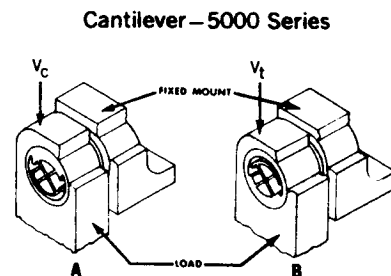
Basic Loading Conditions for Cantilevered Flexural Pivots. Two cantilevered pivots of standard stock size are required per planetary roller.
